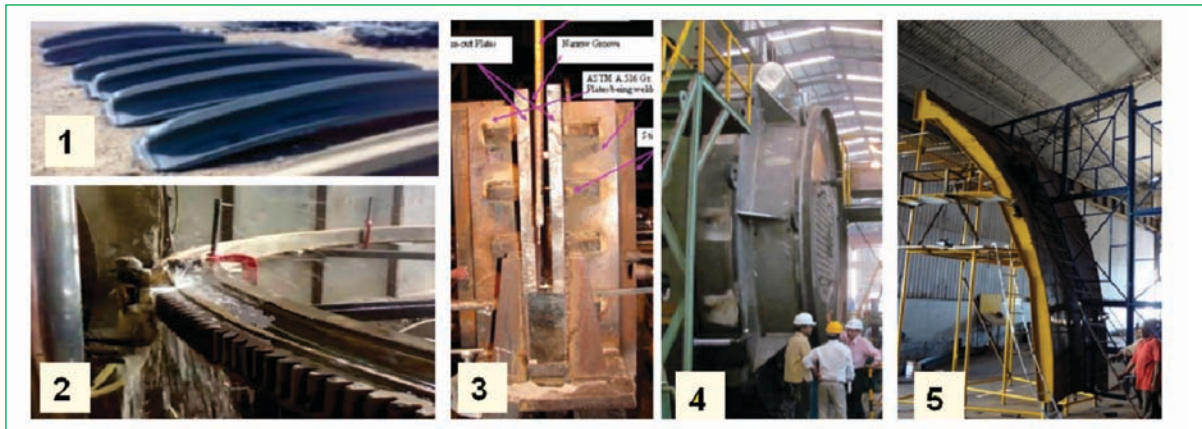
Major components that have undergone technology development exercise are (1) tri-junction forging for dome shaped roof slab, (2) large diameter bearing, (3) thick plate welding for rotatable plugs, (4) welded grid plate and (5) inner vessel with redan of large single torus
